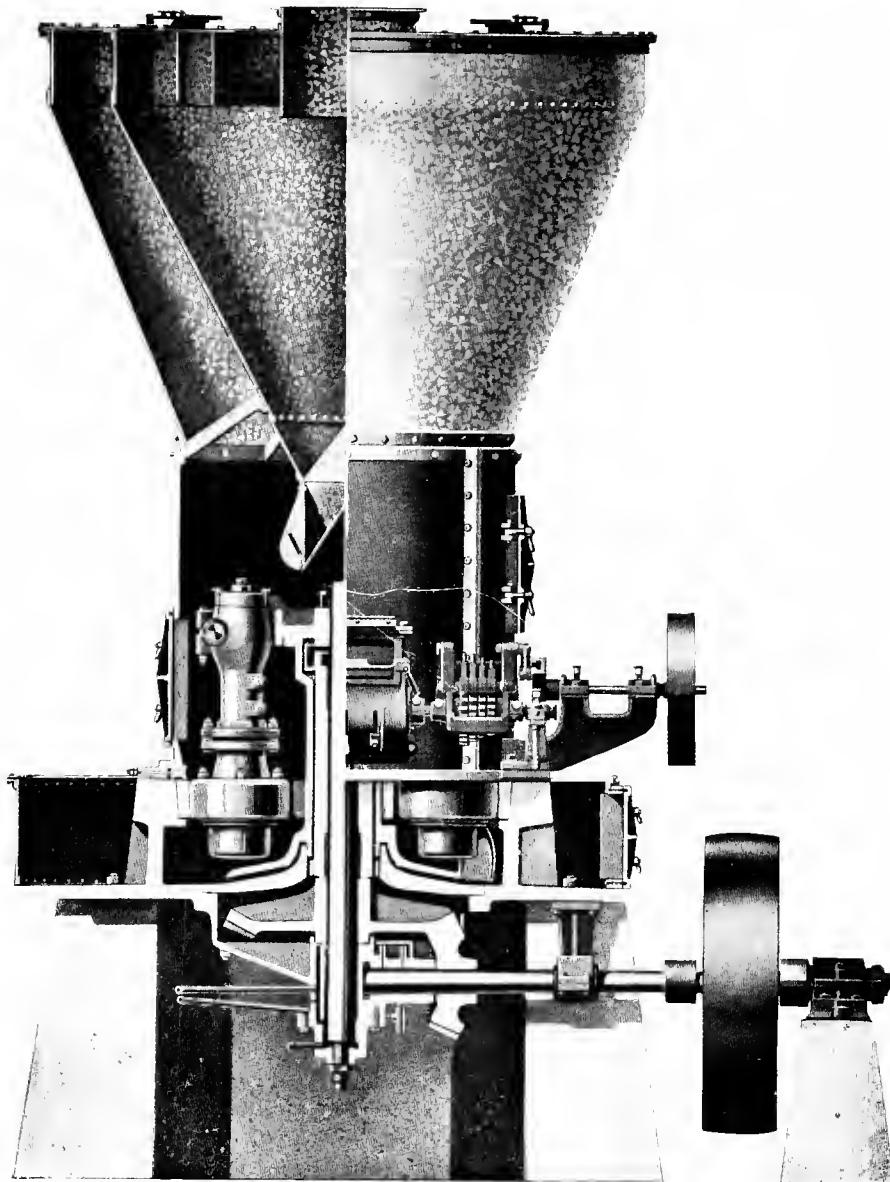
SECTIONAL VIEW OF RAYMOND HIGH-SIDE ROLLER MILL.
